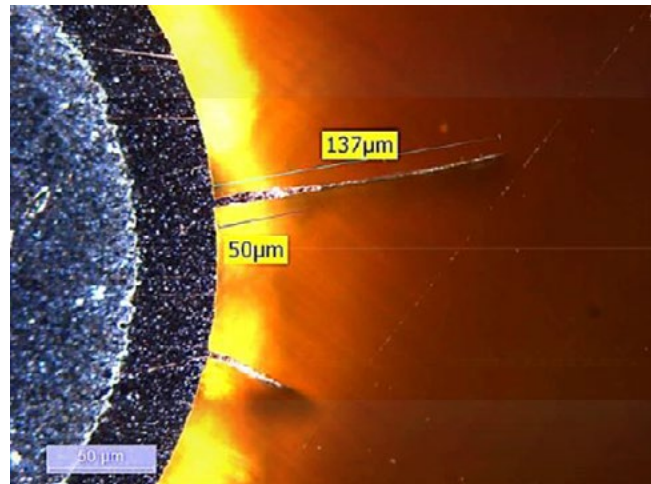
In-plane section of a via without capture pad showing cracks and copper ingress caused by drilling in brittle resin.
